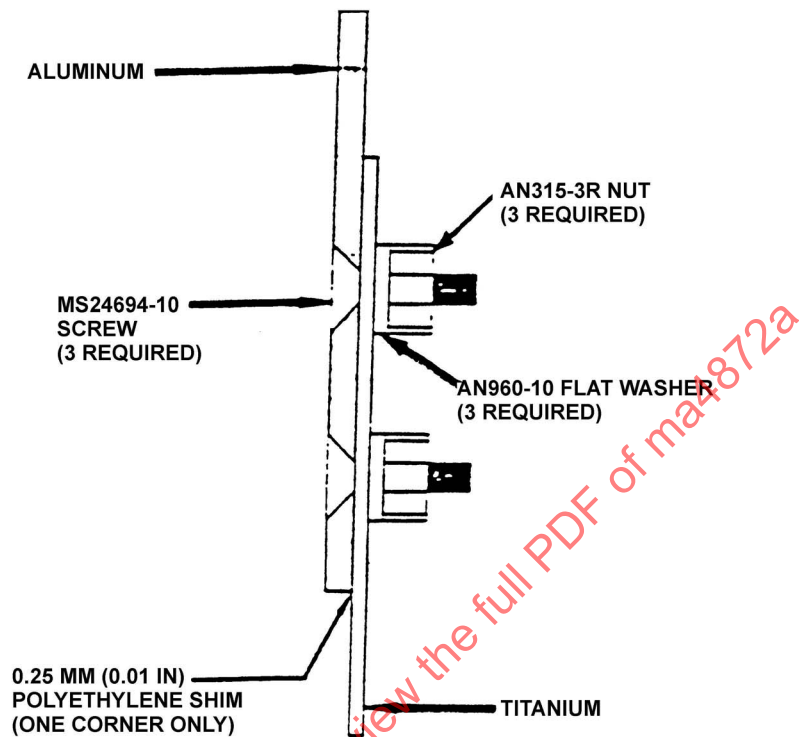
Coupling of Dissimilar Metal Test Specimens
